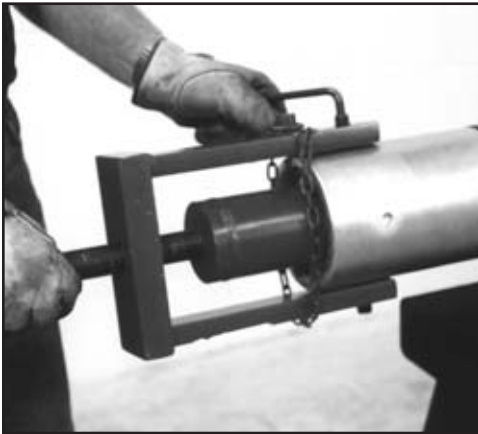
ATTACH FRAME ASSEMBLY TOOL
